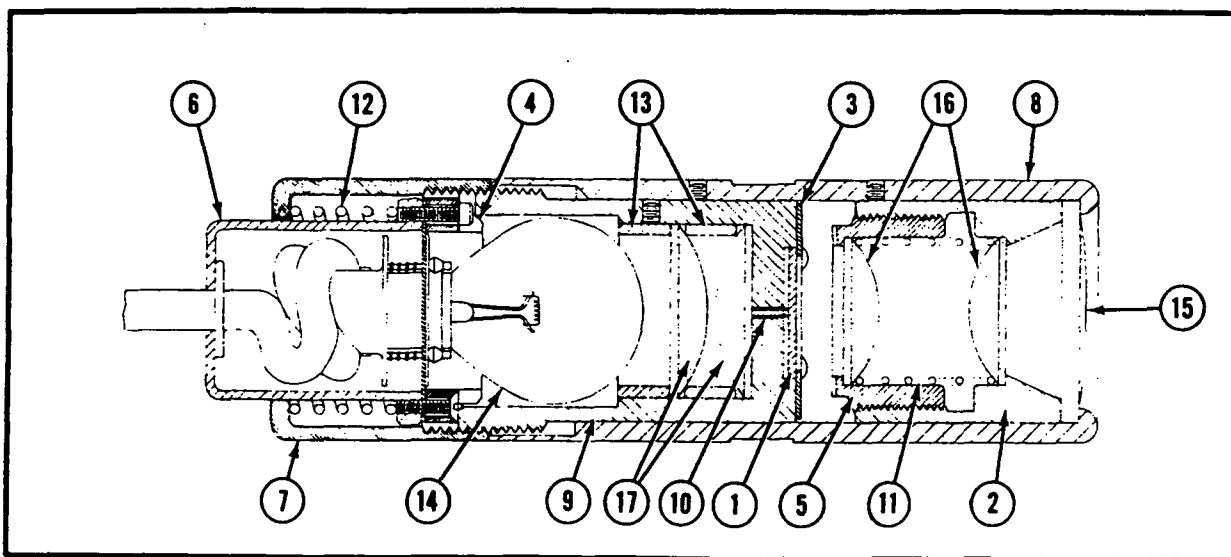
OPTICAL INDICATOR ASSEMBLY
